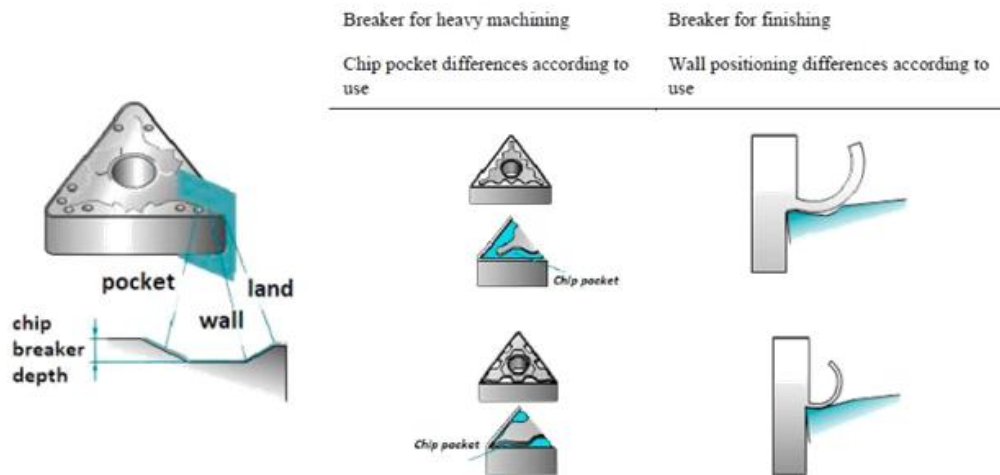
Graphical view of chip breakers for heavy machining and finishing operations
